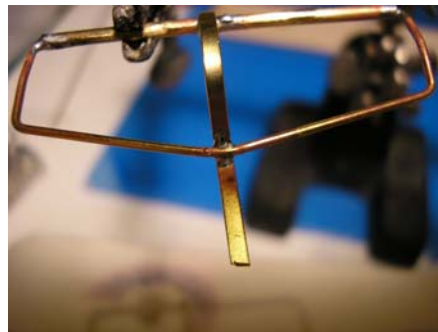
The assembled frame is held by one of the alligator clips in the “helping hands”. The next step was to solder the cross pieces individually in the initial batch of rake frames.
